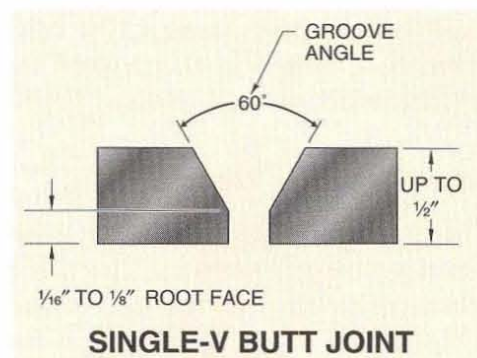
A single-V butt joint is used for heavy steel up to 1/2" thick, and requires a 60° groove angle.
